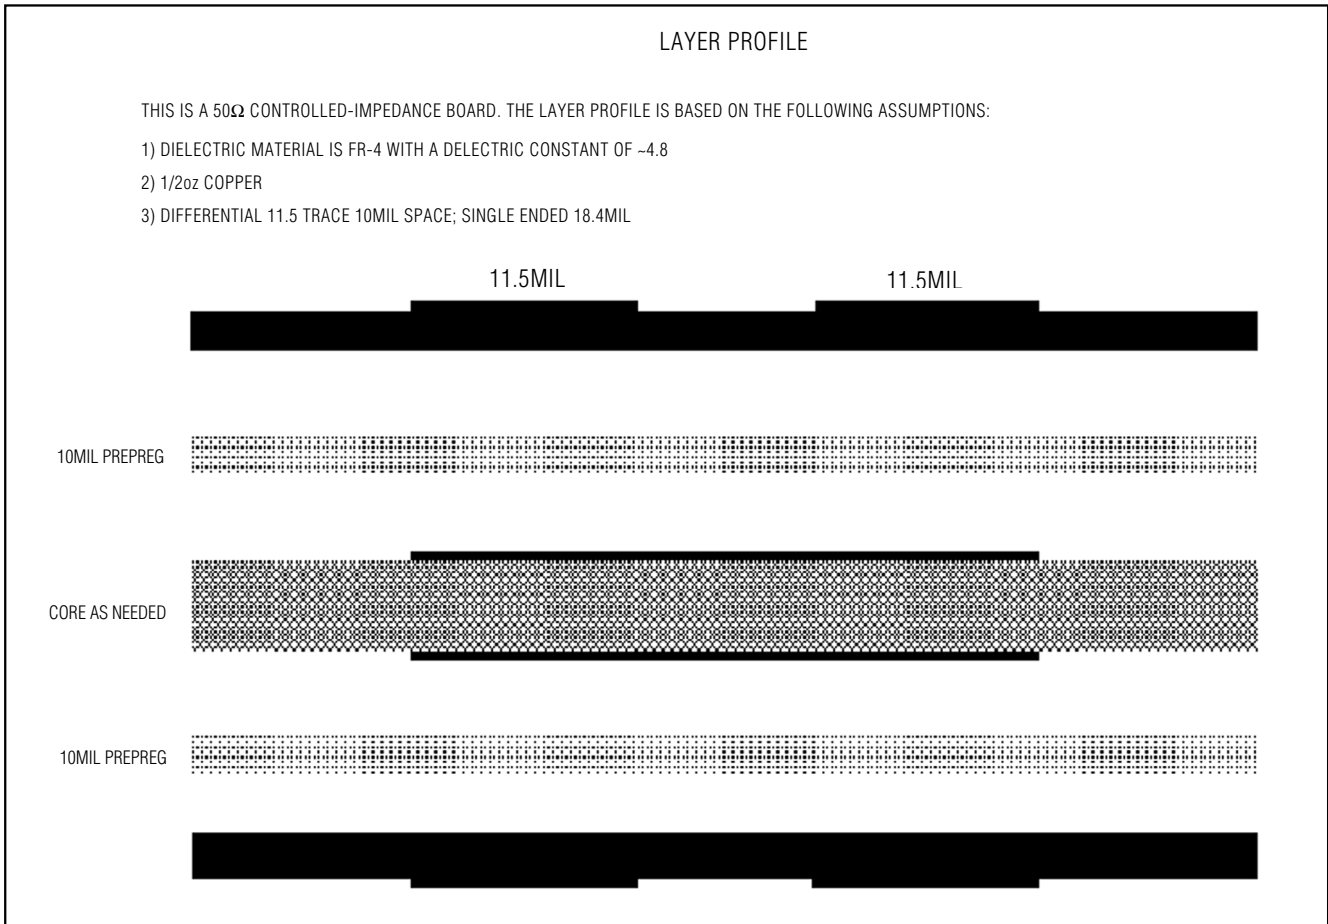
MAX3273 EV Kit PC Board Layer Profile
